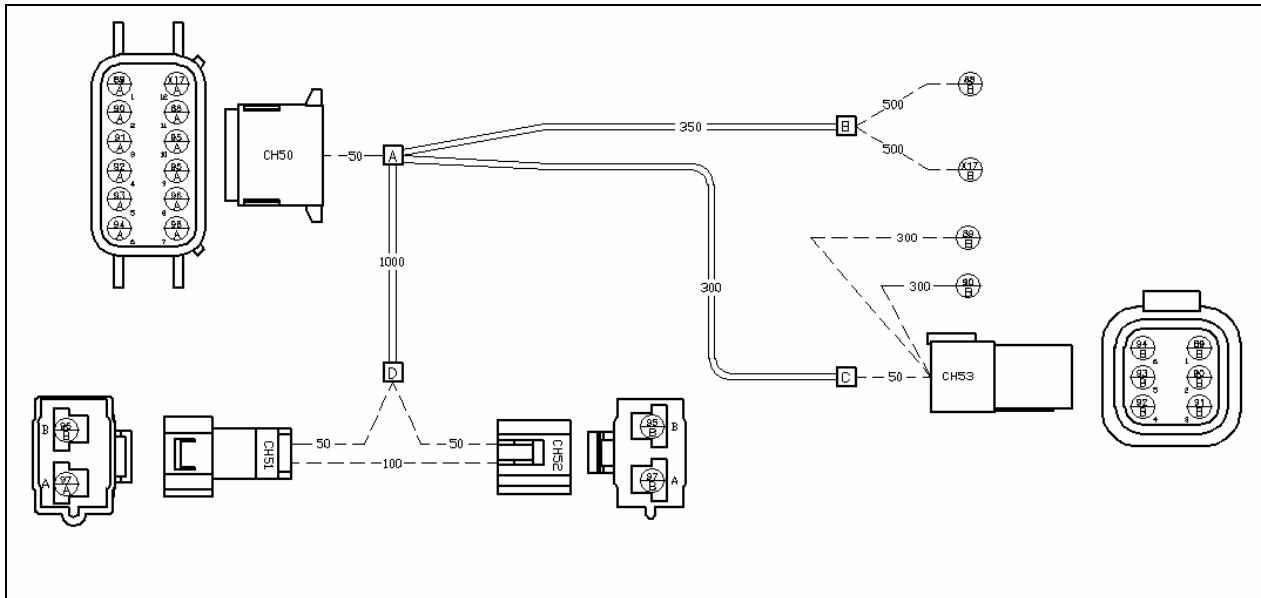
PROTECTION MODULE CABLE ASSEMBLY
